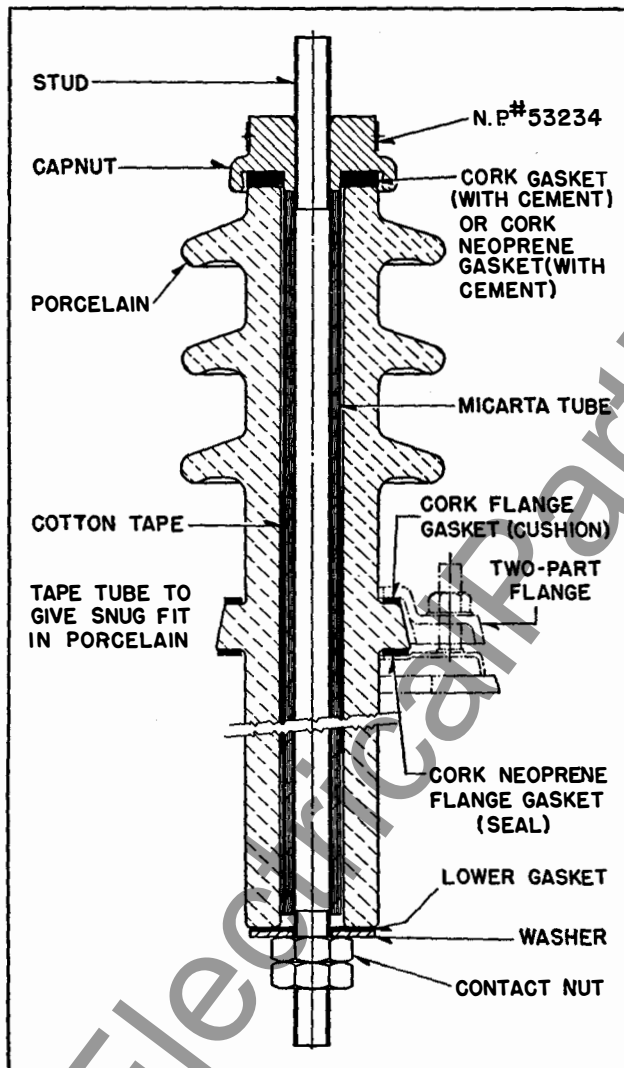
Cross Section of a Typical Bulk Type Bushing.
